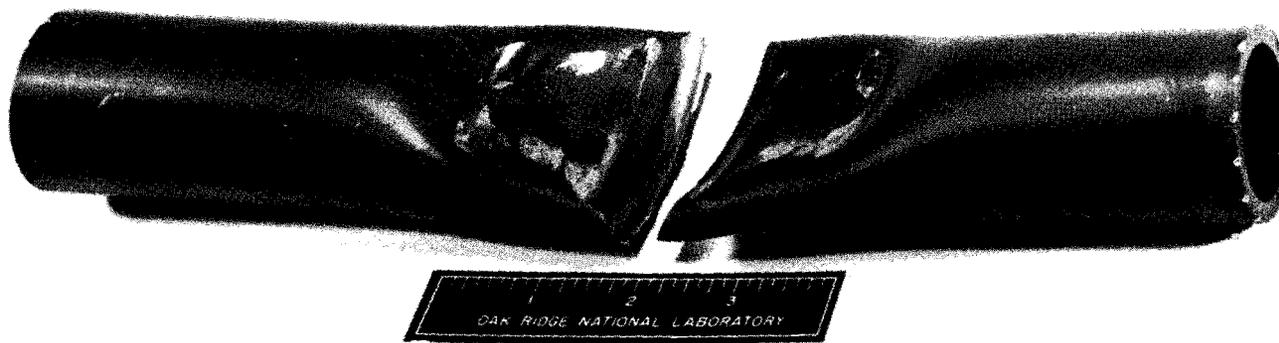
1 1/2-in. Schedule 80 347 Stainless Steel Pipe Cut with Pipe Cutting and Sealing Die.
